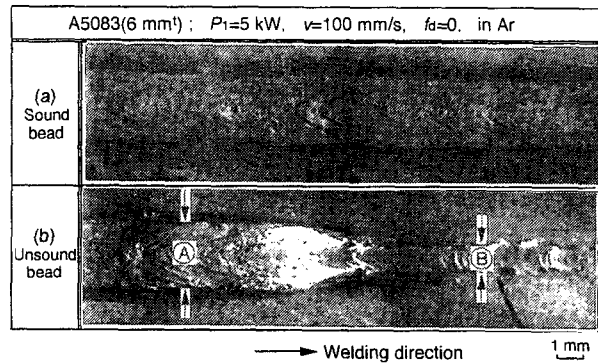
Examples of sound and unsound CO₂ laser weld beads formed in A5083 alloy.
